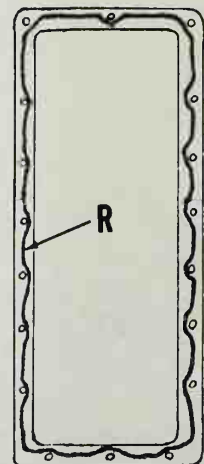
Apply RTV form-in-place gasket in a 2 mm bead (R) to oil pan flange as shown.
